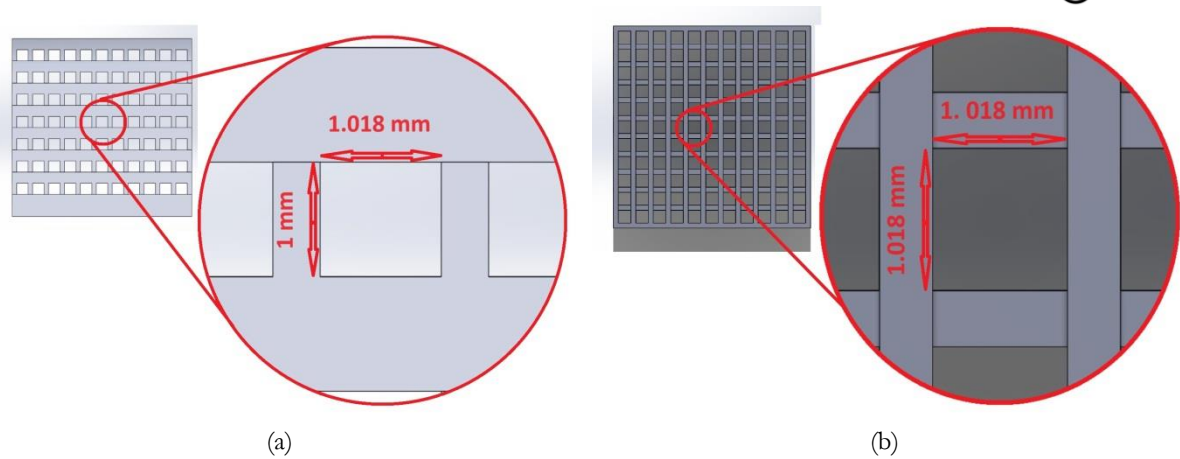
(a) Dimensions of pores at the sides of specimen and (b) Dimensions of pores at the top and bottom of specimen.
